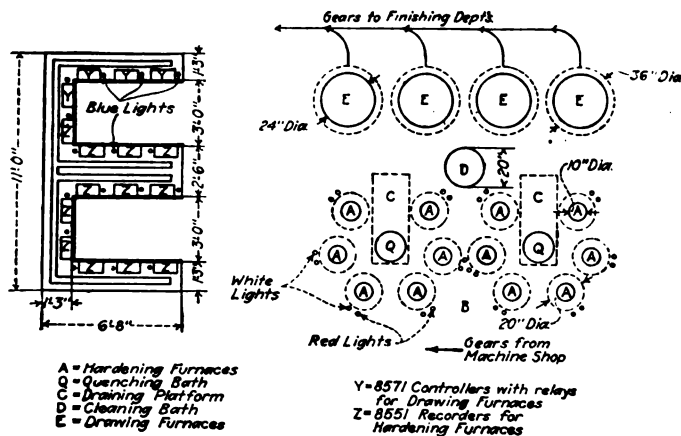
Layout of hump method heat treatment equipment in the machine shop of an automobile gear plant
